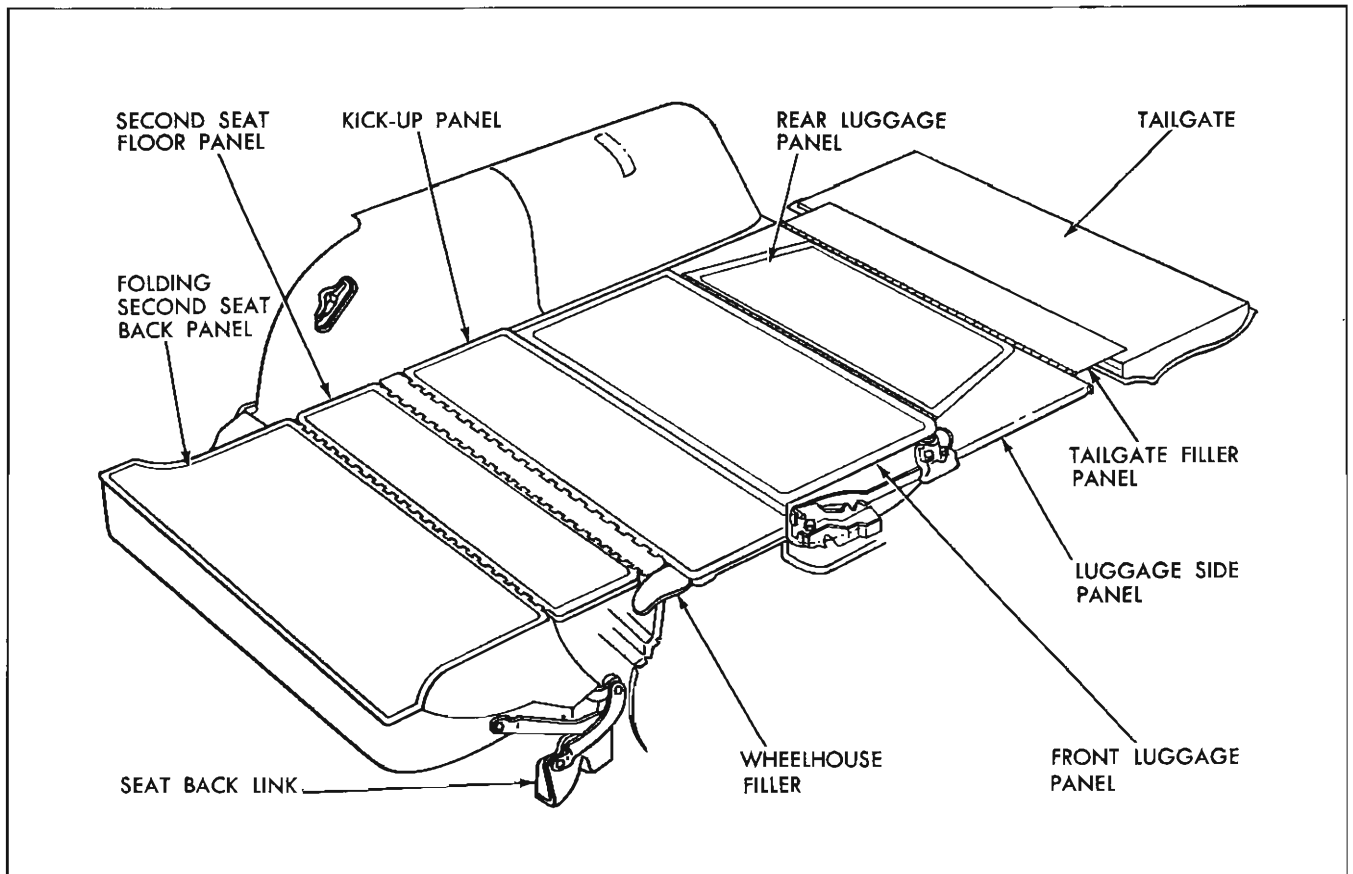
Six Passenger Folding Seat and Rear Compartment Panels
